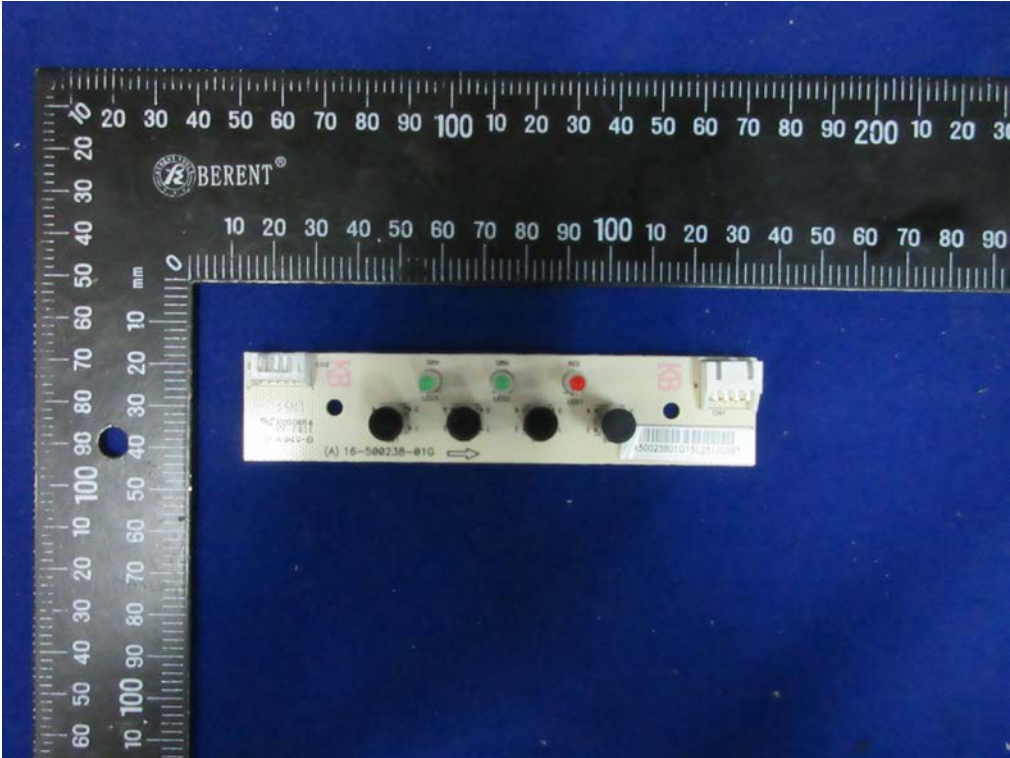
FlinInfini Lite 5kW-48V PCB of panel board components view
